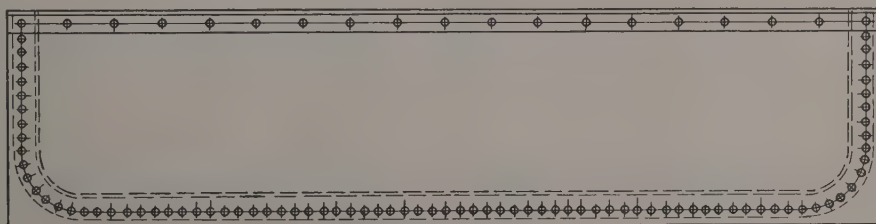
(right) — Welded galvanizing kettle, 25 x 4 x 4 ft. Bottom and sides are formed of one plate of 1½-in. special firebox steel. Steel angles, 4 x 4 x ¾-in., are riveted to the sides and ends at the top with rivets countersunk and driven flat on inside of kettle
